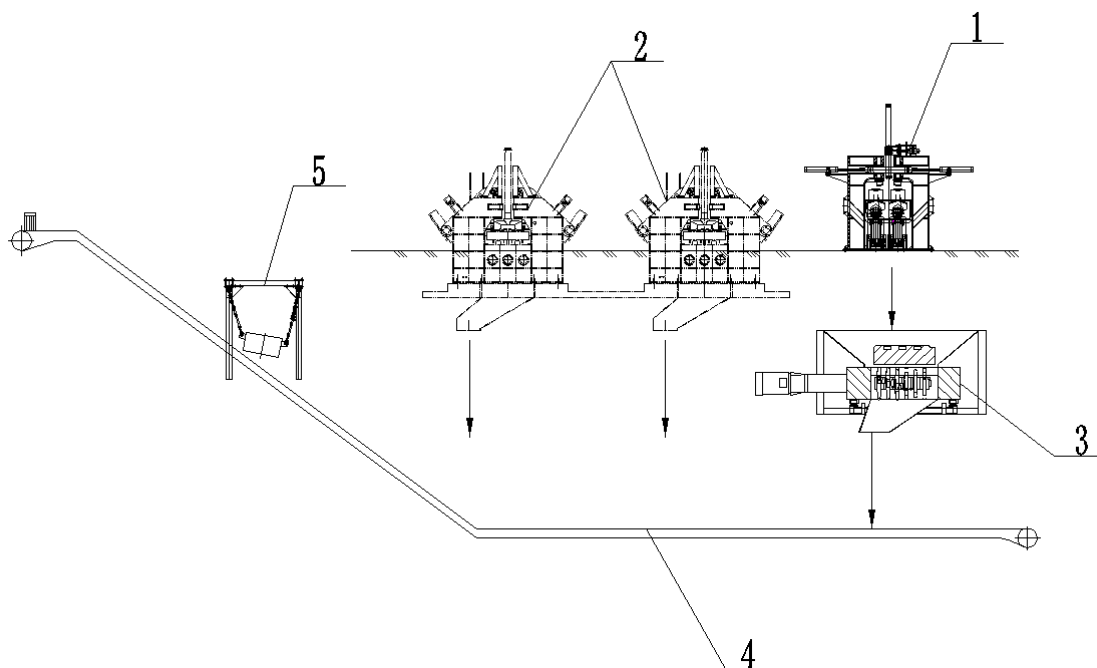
Equipment flow diagram of butts pressing process. 1-Large butts press, 2-Automatic butts press, 3-Hydraulic crusher, 4-First-stage high-angle belt conveyor, 5-First-stage de-ironing separator.
